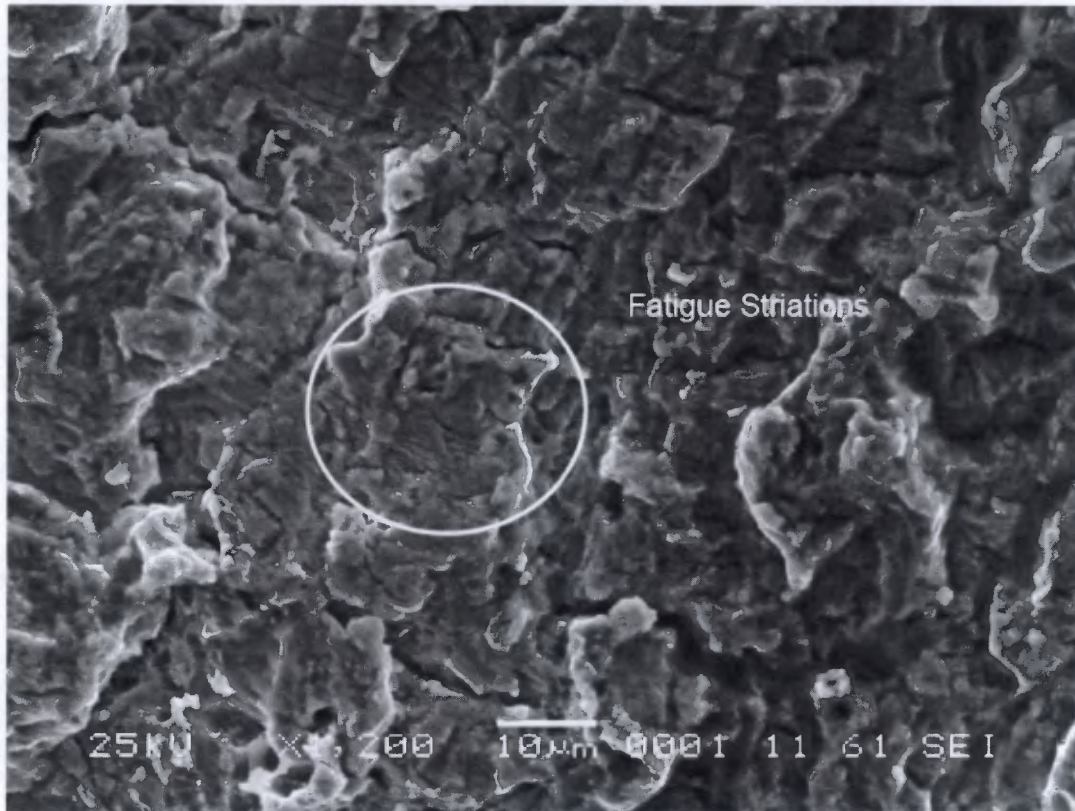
Typical Fatigue Fracture Defined by Striations
